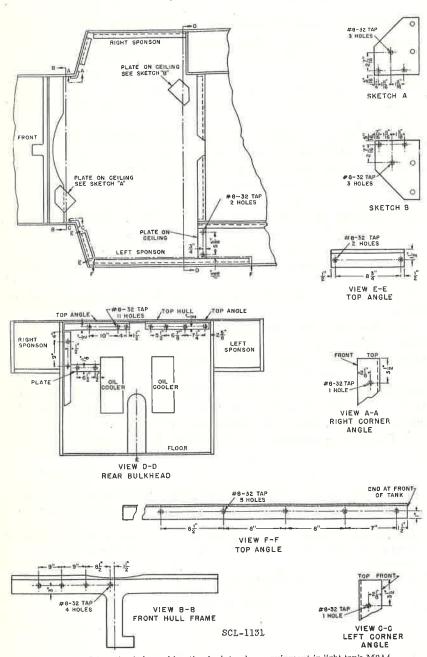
Mounting holes and location for interphone equipment in light tank M2A4.
